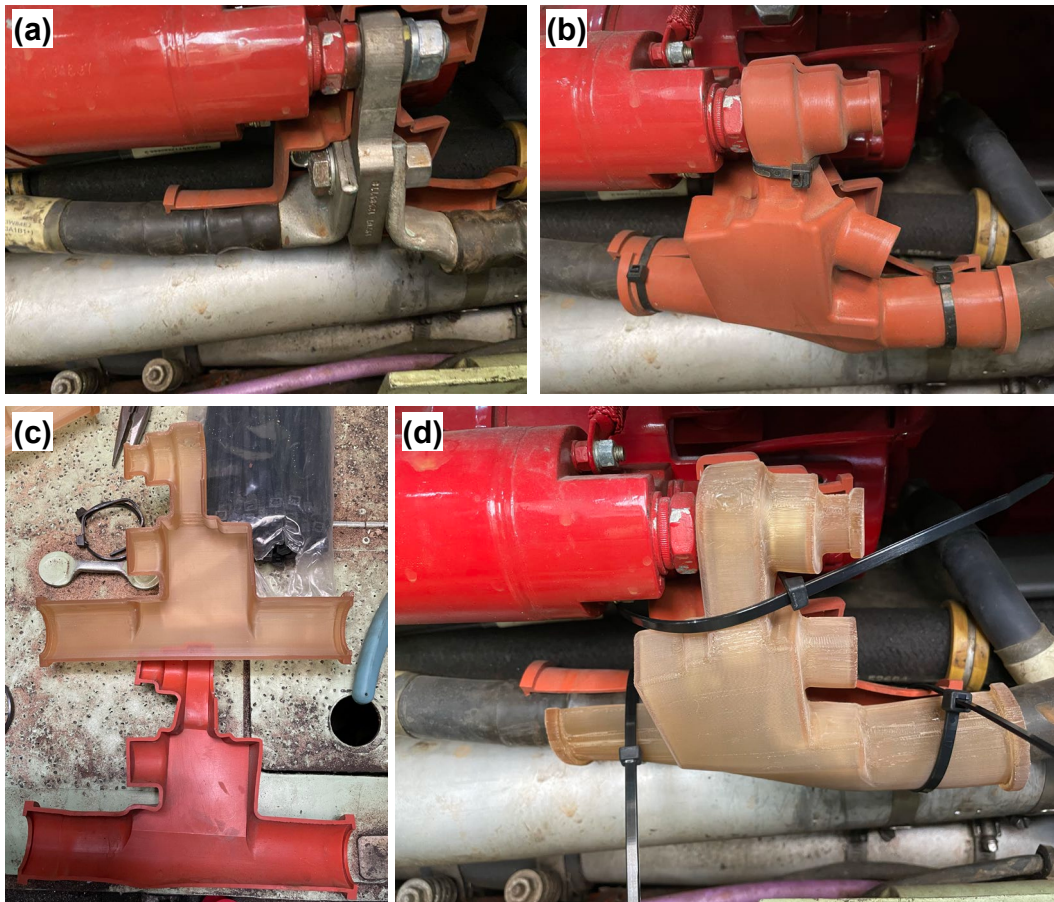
Bus bar cover assembly test fit in vehicle: (a) location of cover assembly in vehicle with OEM Part 2 removed, (b) fit of OEM assembled cover assembly, (c) side-by-side comparison of the OEM vs. the molded Part 2, and (d) molded Part 2 of the assembly installed on the vehicle.
